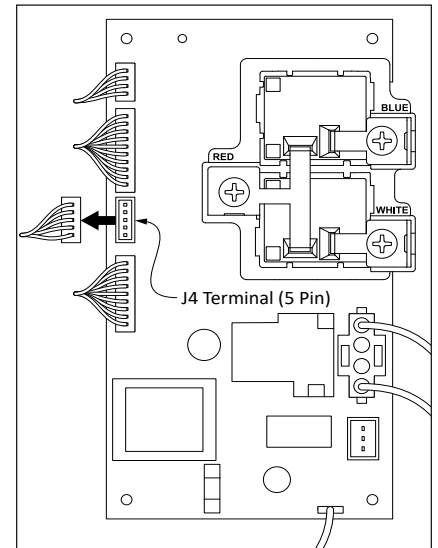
Locating J4 Terminal on Printed Circuit Board
